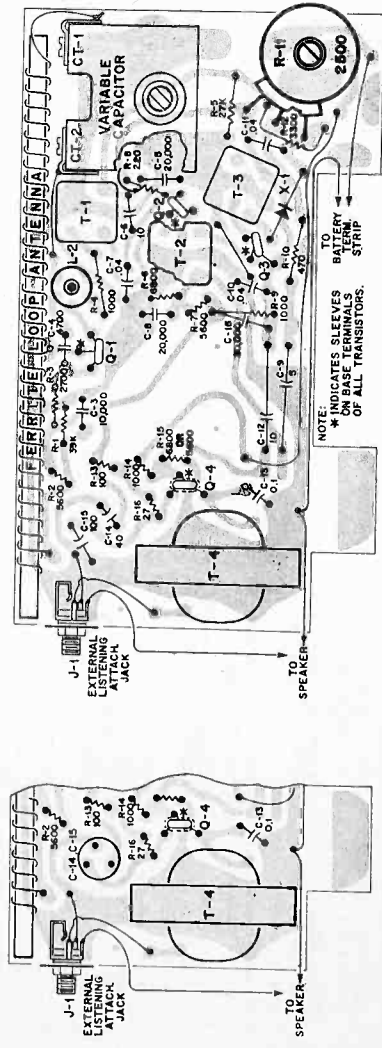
(A) TOP (B) BOTTOM VIEWS, ETCHED PRINTED CIRCUIT CHASSIS 120457
